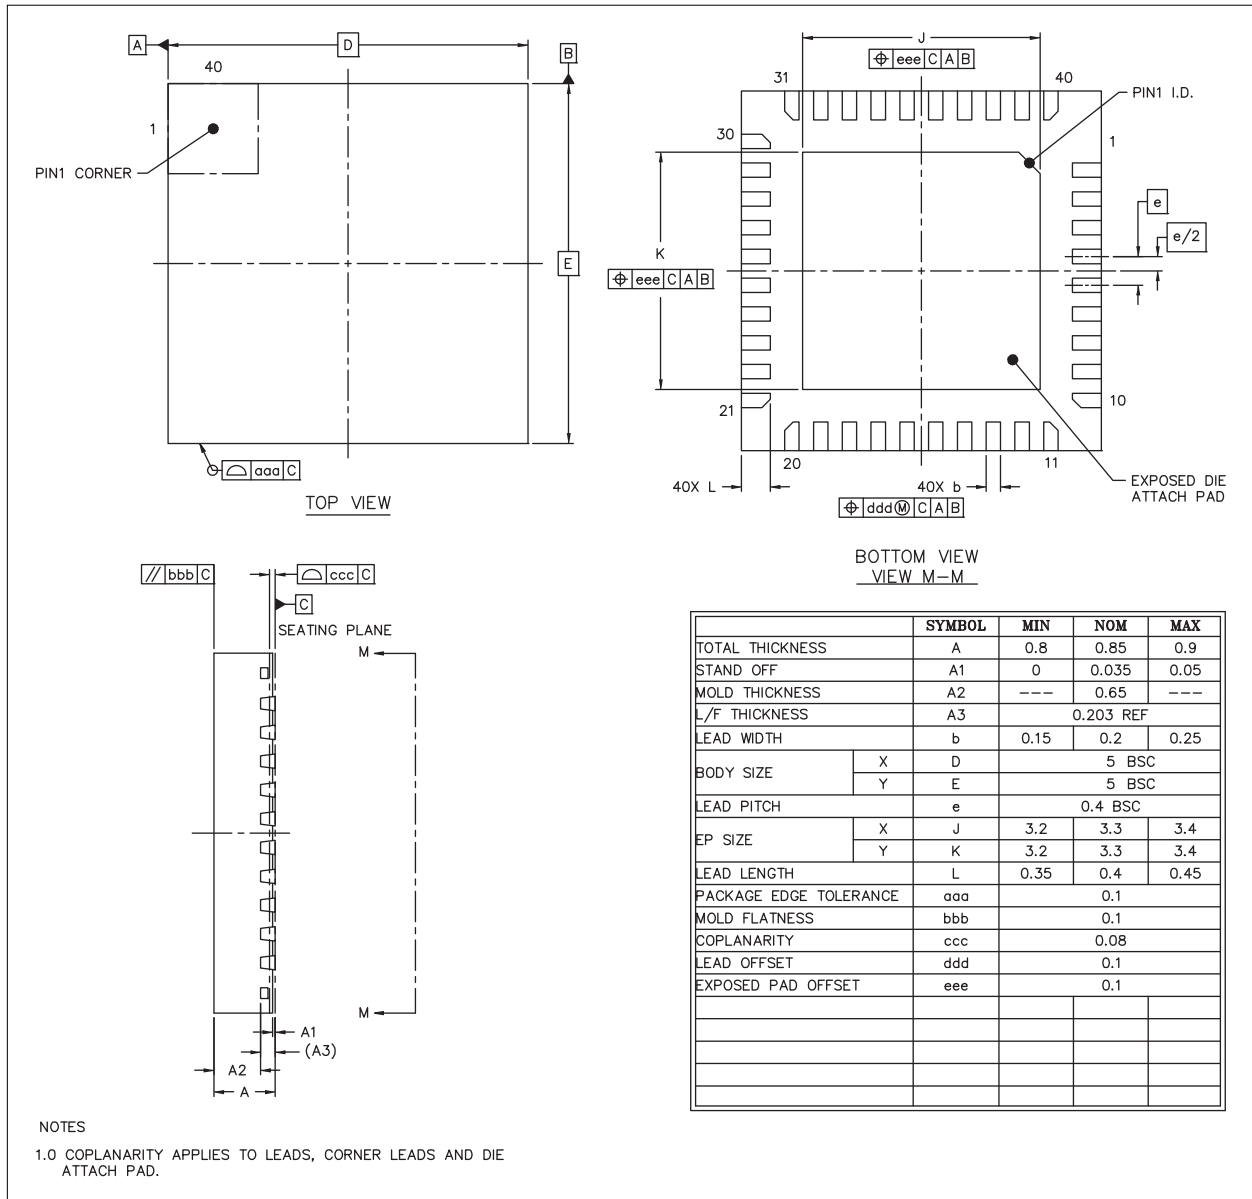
CX8000/CX8050 40-QFN Package Drawing
